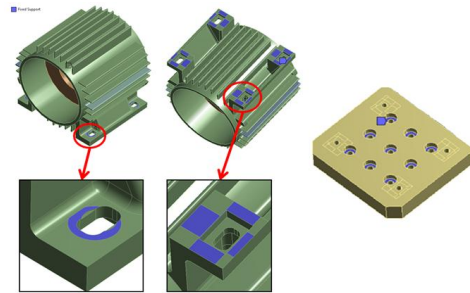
Boundary Condition for Fixture and Motor Housing Lugs
